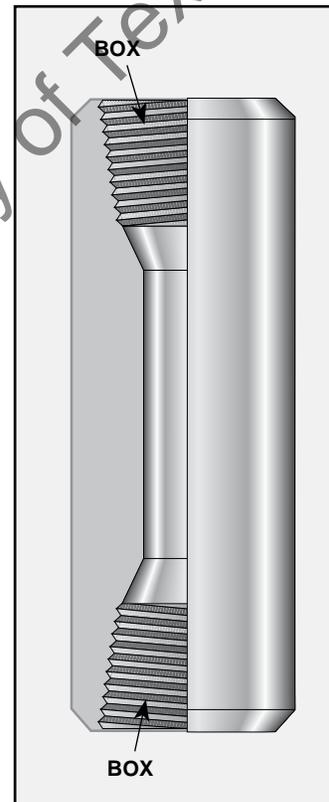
A bit sub; drawing shows a quarter-section taken out to show box threads inside the sub.
